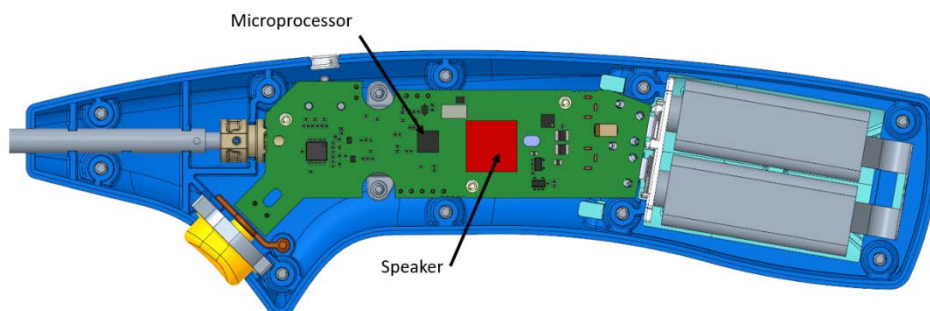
MaxTack™ Motorized Fixation Device Handle Internal Assembly – 2
